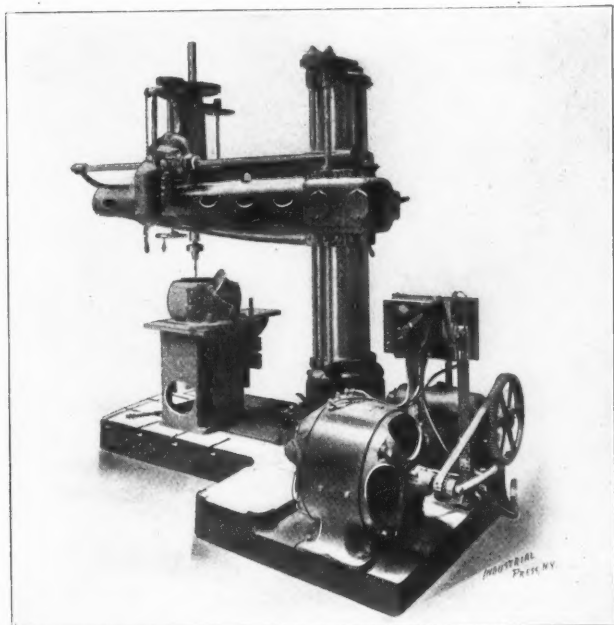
Bickford Radial Drill, with Motor on Extension Base. Constant Speed Motor, Renold Chain Drive.
